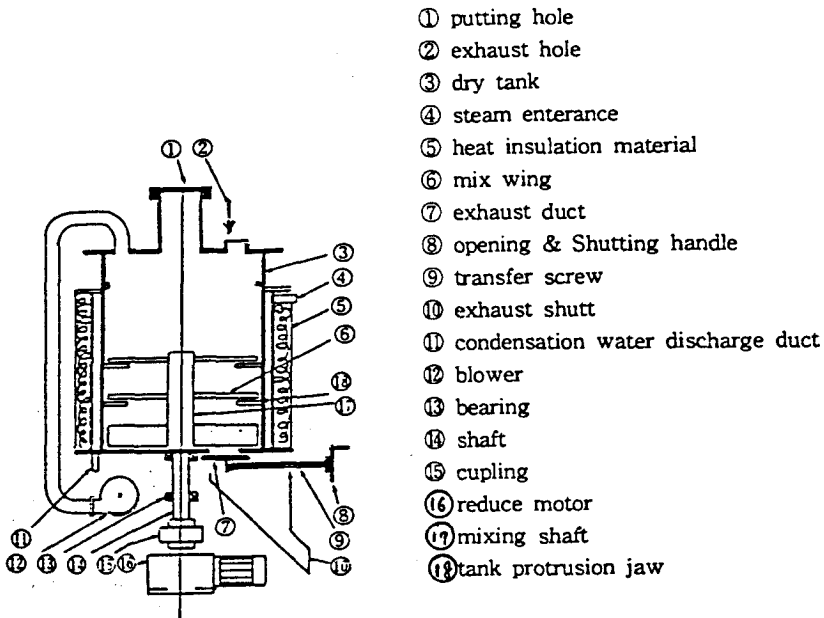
Cross-sectional view of the rapid steam drying machine.
